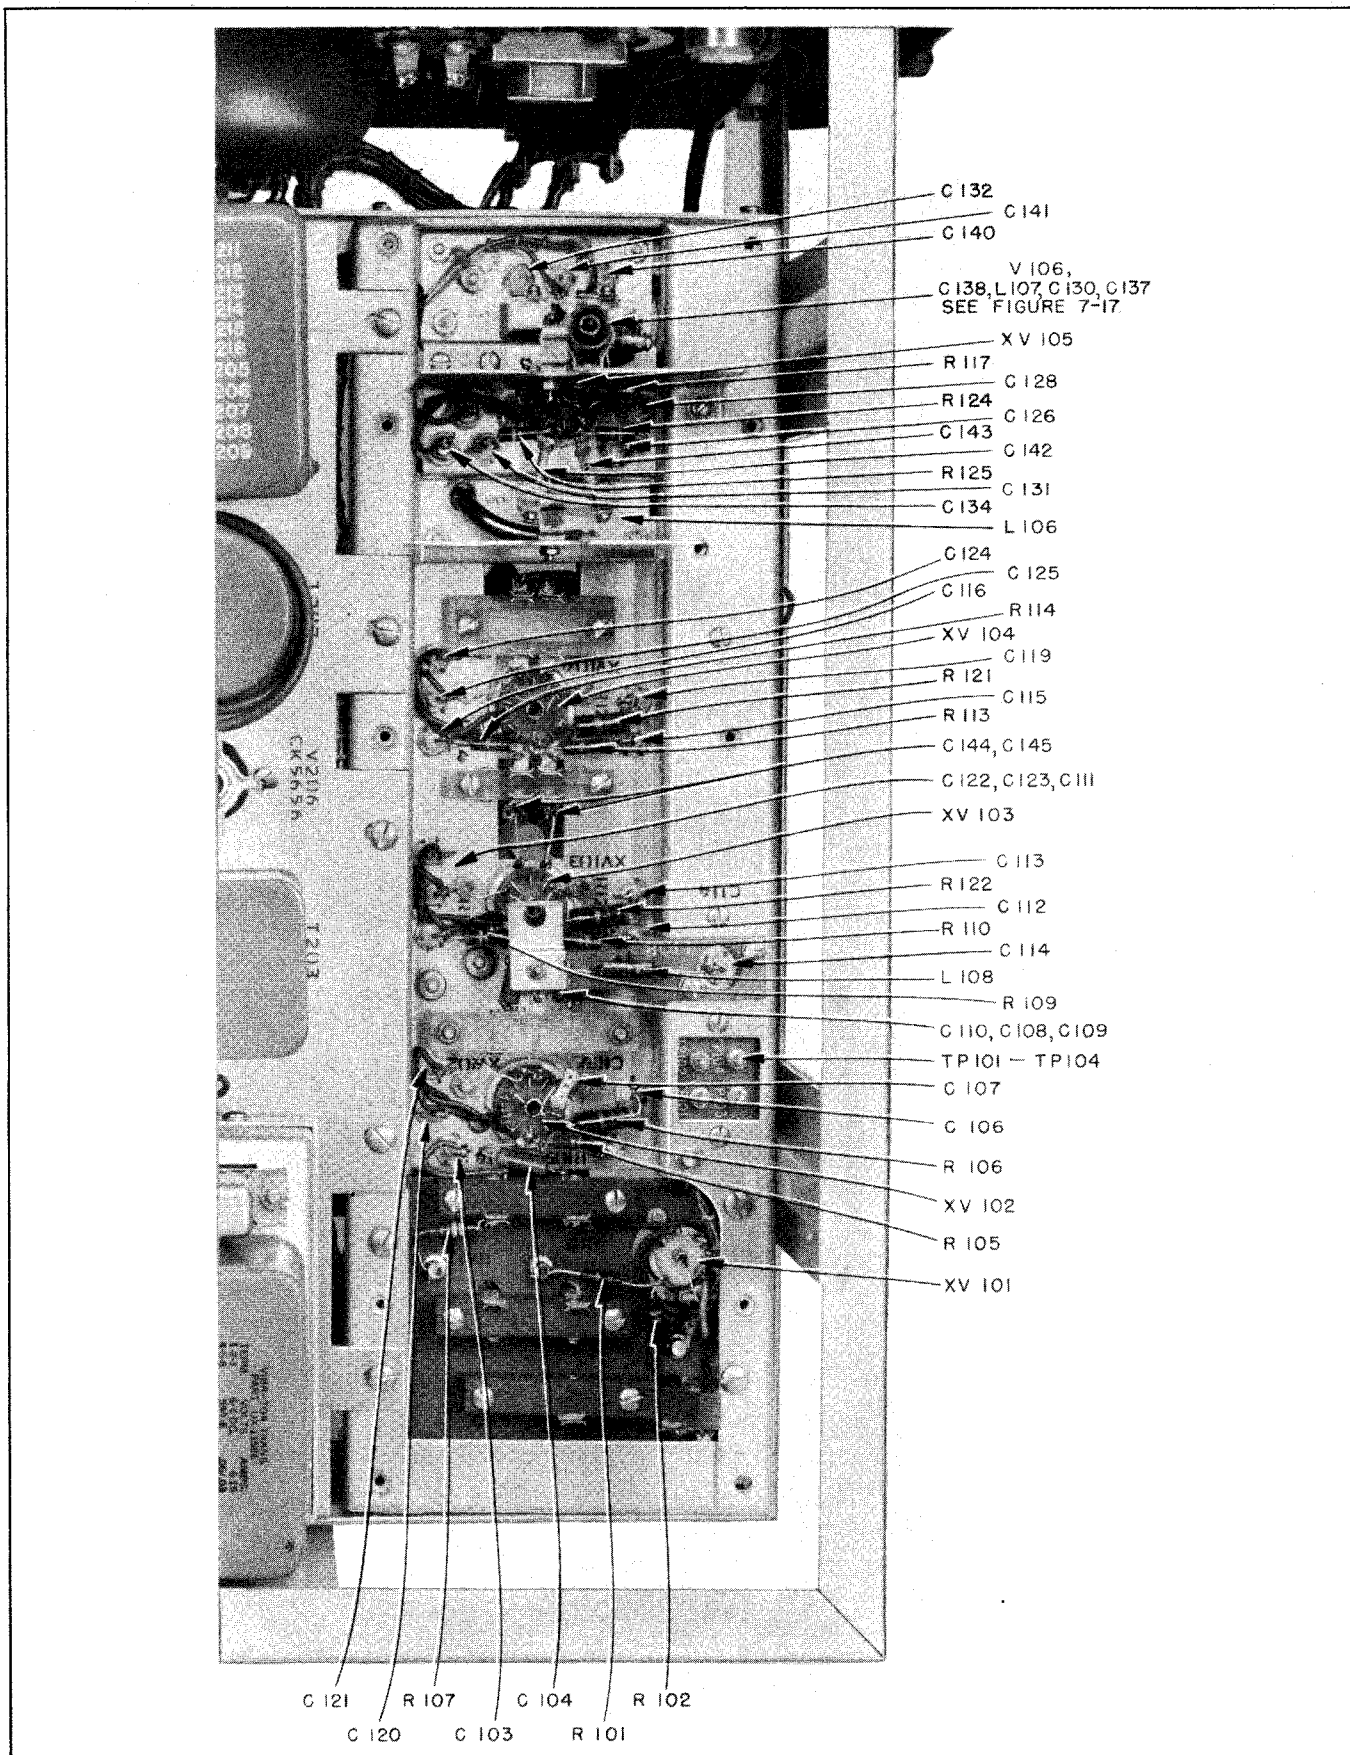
Underside of RF Chassis, Showing Component Locations.
